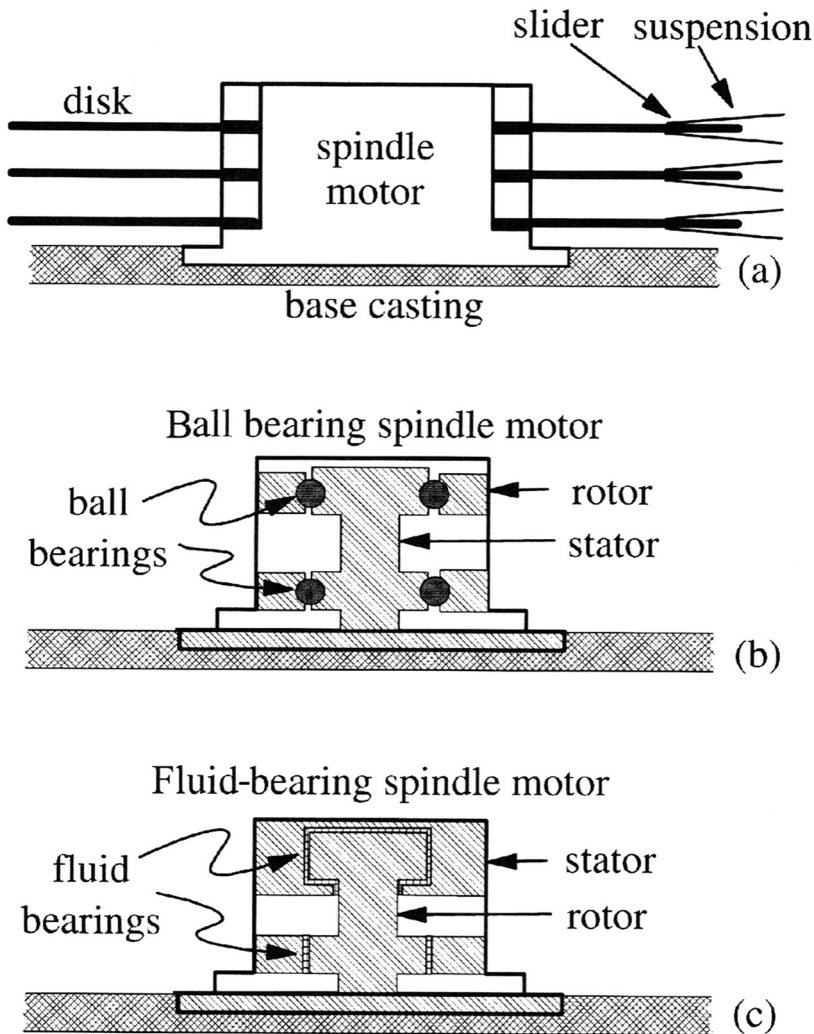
Schematic illustration of the disk pack on the spindle motor with the head suspension assembly (a), a ball bearing spindle motor (b), and a fluid-bearing spindle motor (c).
